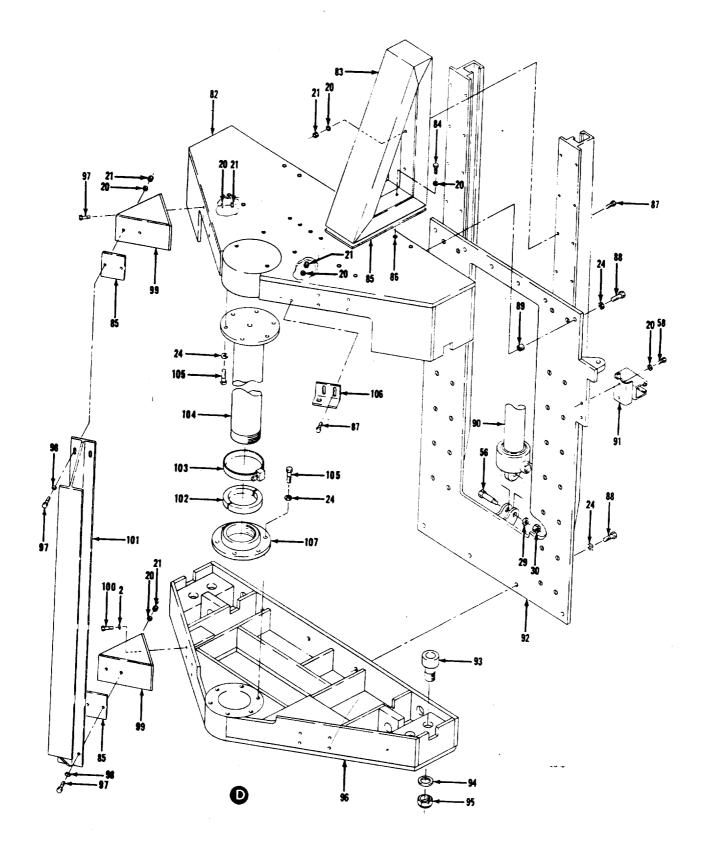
LES Coupler Assembly (Sheet 5 of 9)
